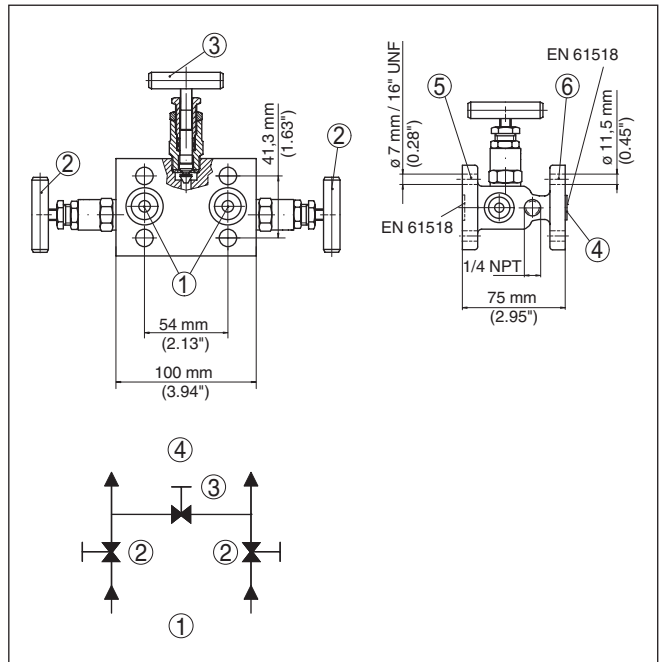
Configuration of 3-fold valve block according to EN 61518
